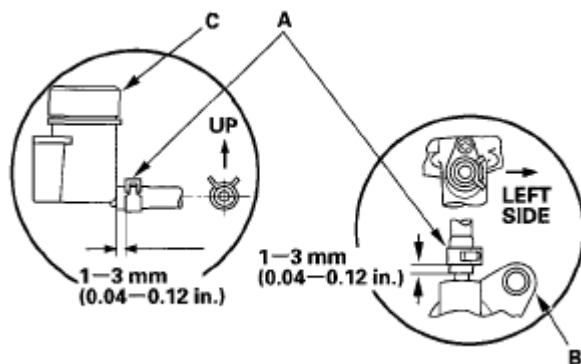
Identifying Hose Clamps, Master Cylinder And Reservoir
